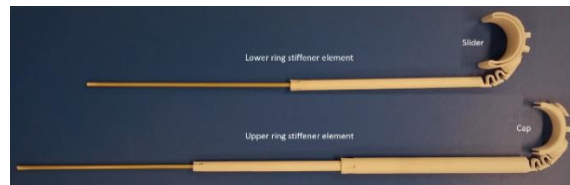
Assembled lower stiffener ring element (top) and an upper stiffener ring element (bottom)
